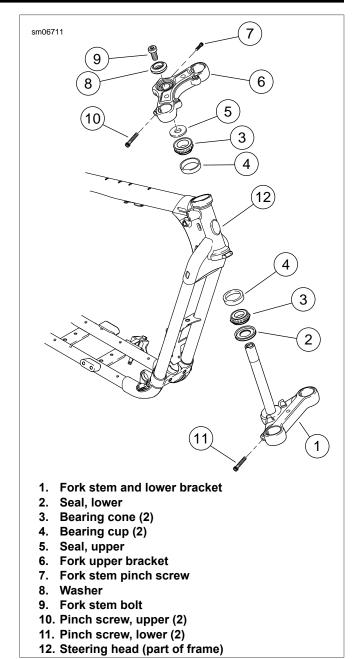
Fork Stem and Bracket Assembly: Typical
